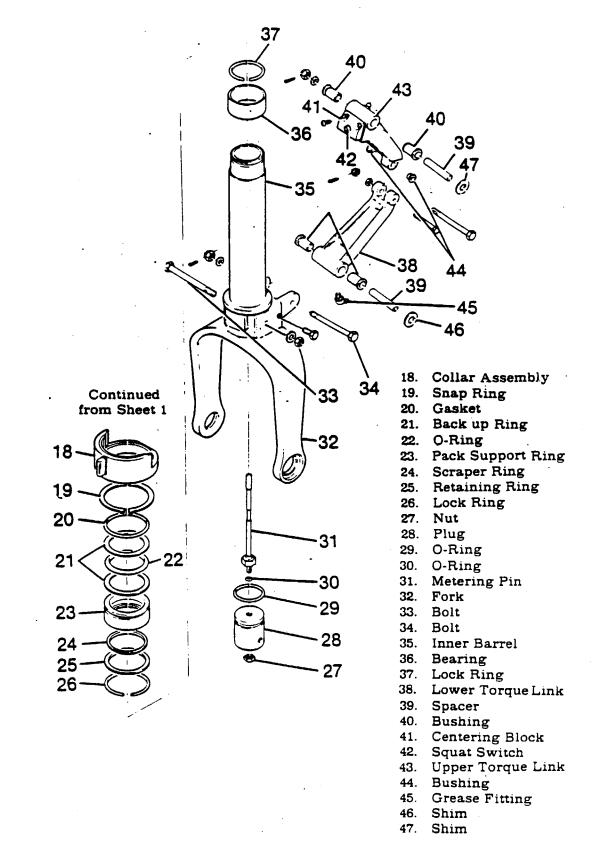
Nose Gear Strut (Sheet 2 of 2)
